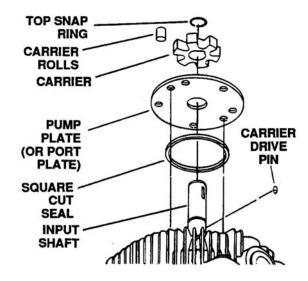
Removing Carrier Rolls and Snap Ring From Input Shaft
